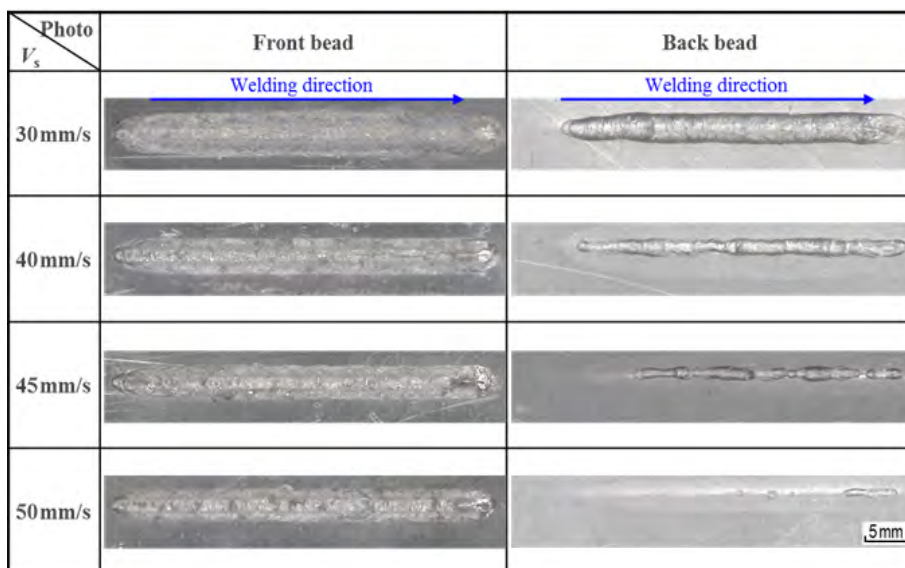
Weld bead appearance of AA6451-AA6014 laser lap dissimilar welding by change welding speed at 5 kW laser power
